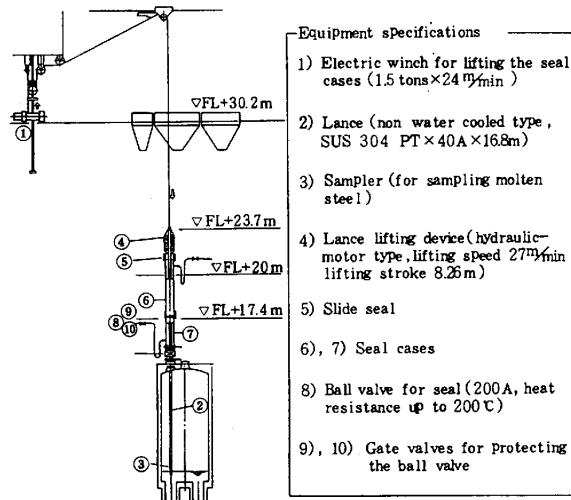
Outline of the molten steel sampling equipment in vacuum vessel
